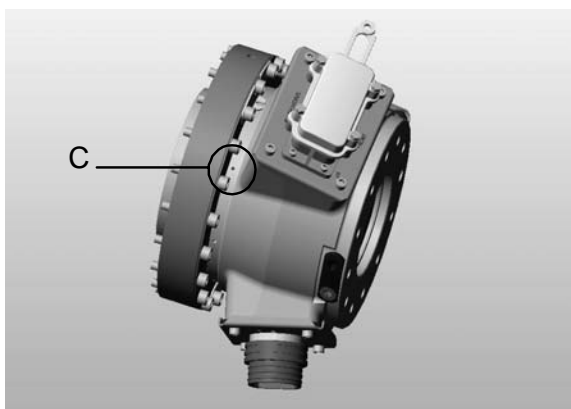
Seven holes C, on a radius of x mm from axis 6 center on the flange for IRB 6600ID/IRB 6650ID.
